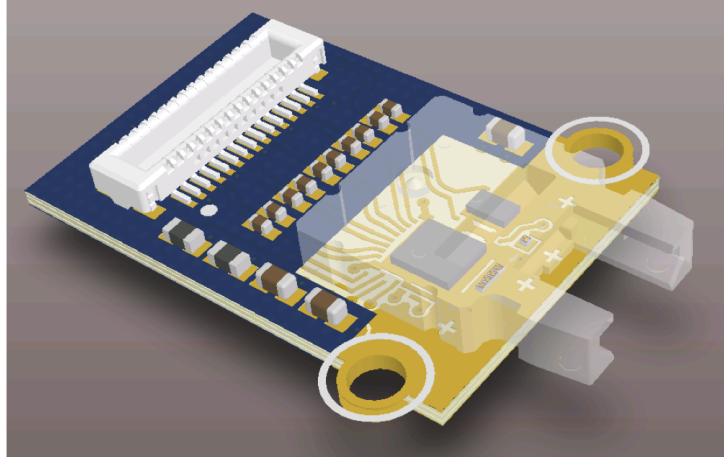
VTRx+ module implementation cartoon, showing the possible position of the Quad Laser Driver as the larger of the two grey boxes on the PCB.
